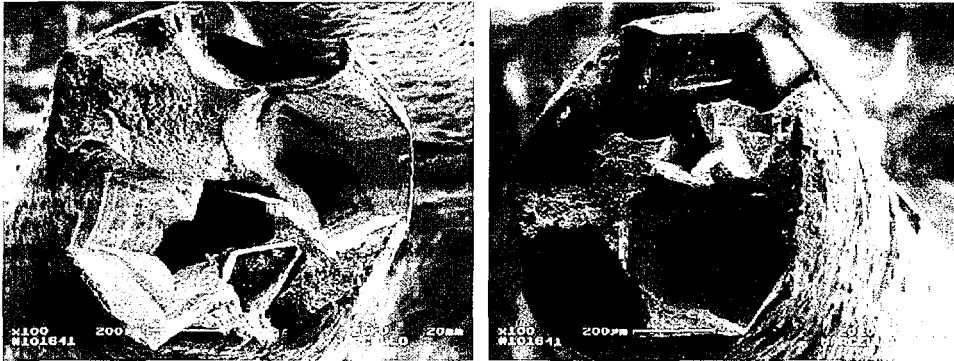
Examples of fractures of the diamond composite $\phi = 1.20\text{mm}$
